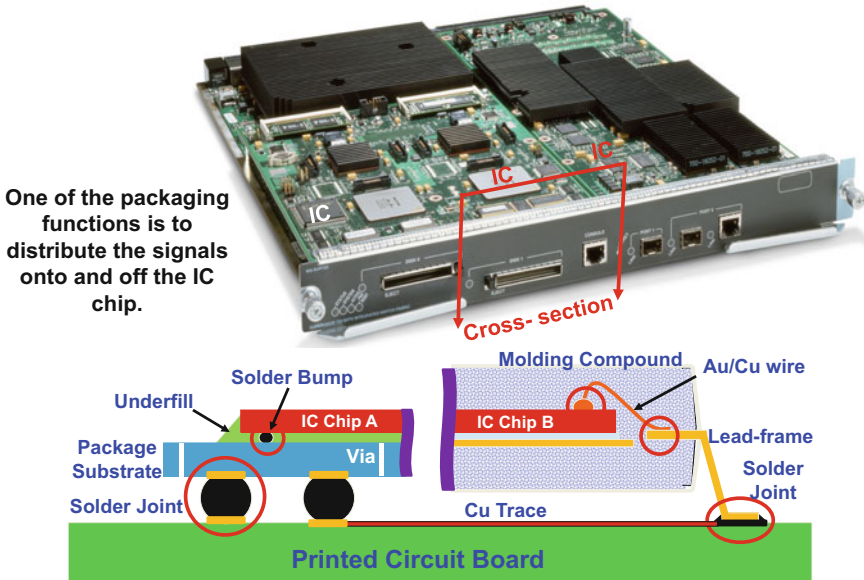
Inside an electronic product and schematic of the cross section of a typical PCB
